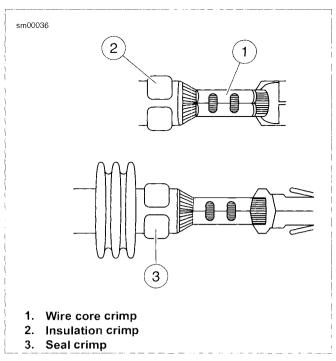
Metri-Pack Connector: Inspect Core and Insulation/Seal Crimps
